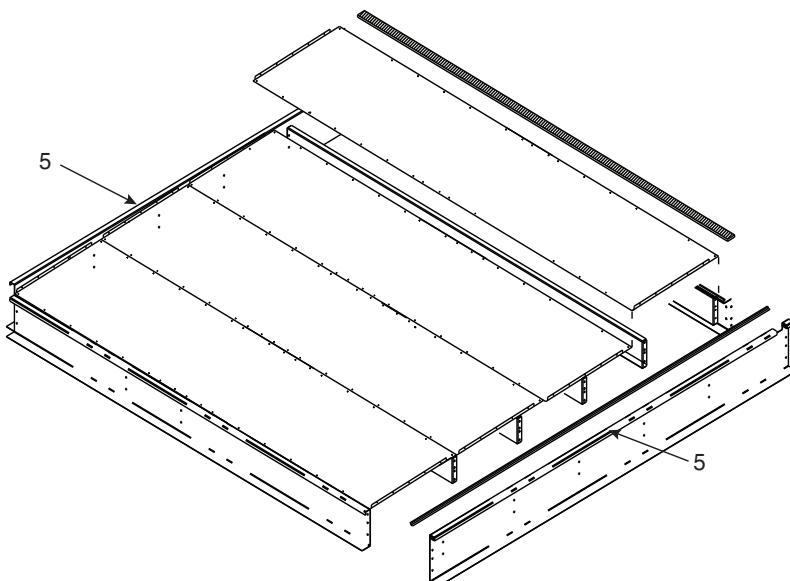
Gasket Location — Condenser Section Roof Curb
